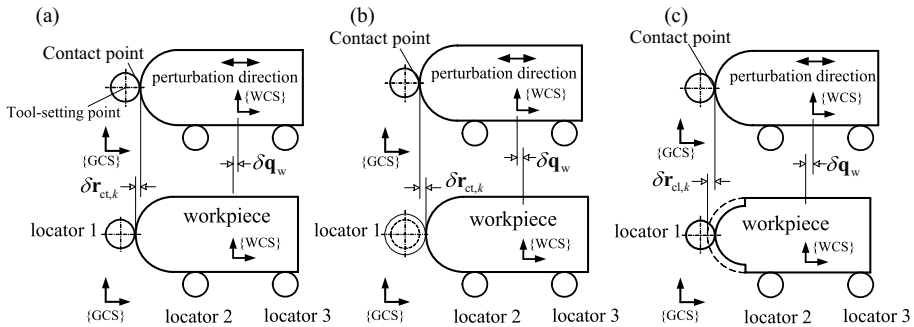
The locating scheme consists of locators: a) illustration of the setup error; b) illustration of the manufacturing default of locator; c) illustration of the manufacturing default of workpiece.
